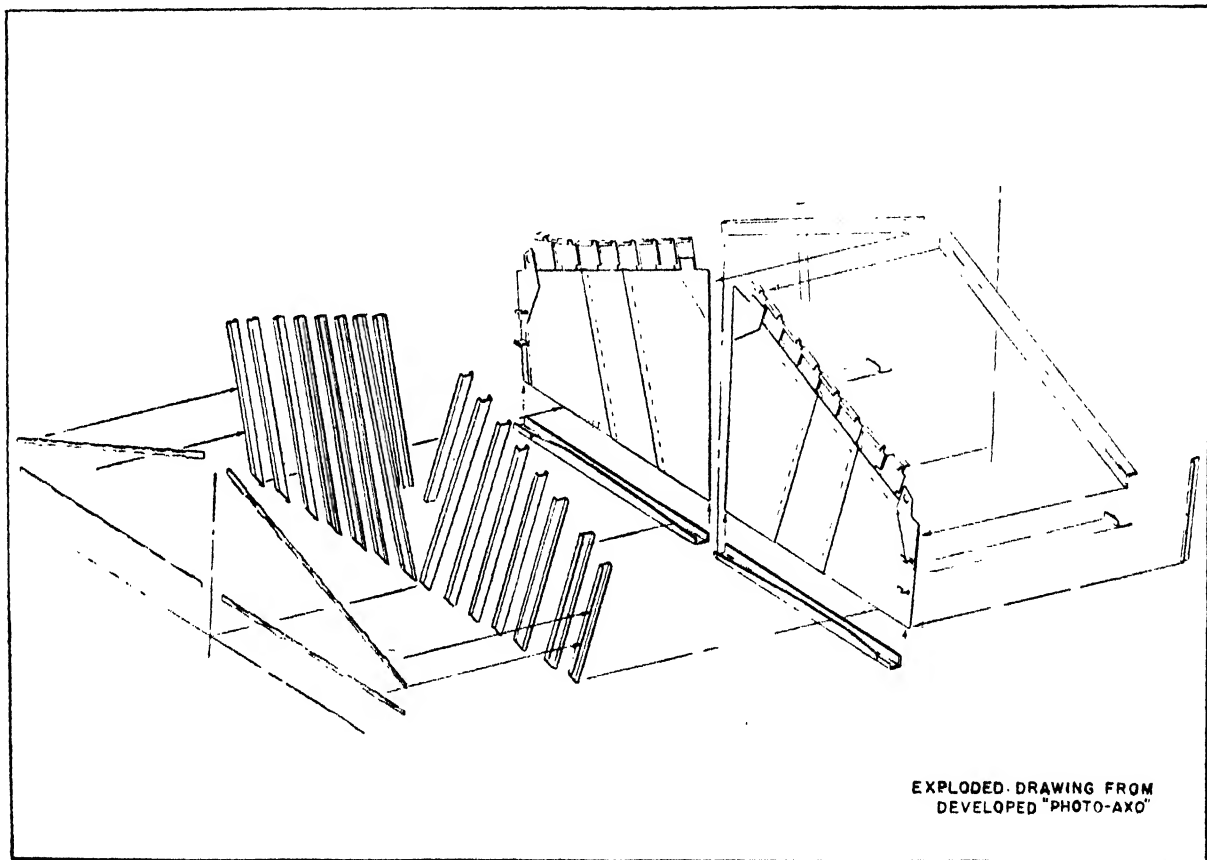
“Exploded” drawing developed from trimetric drawing of Fig. 19. (Glenn L. Martin Company.)
